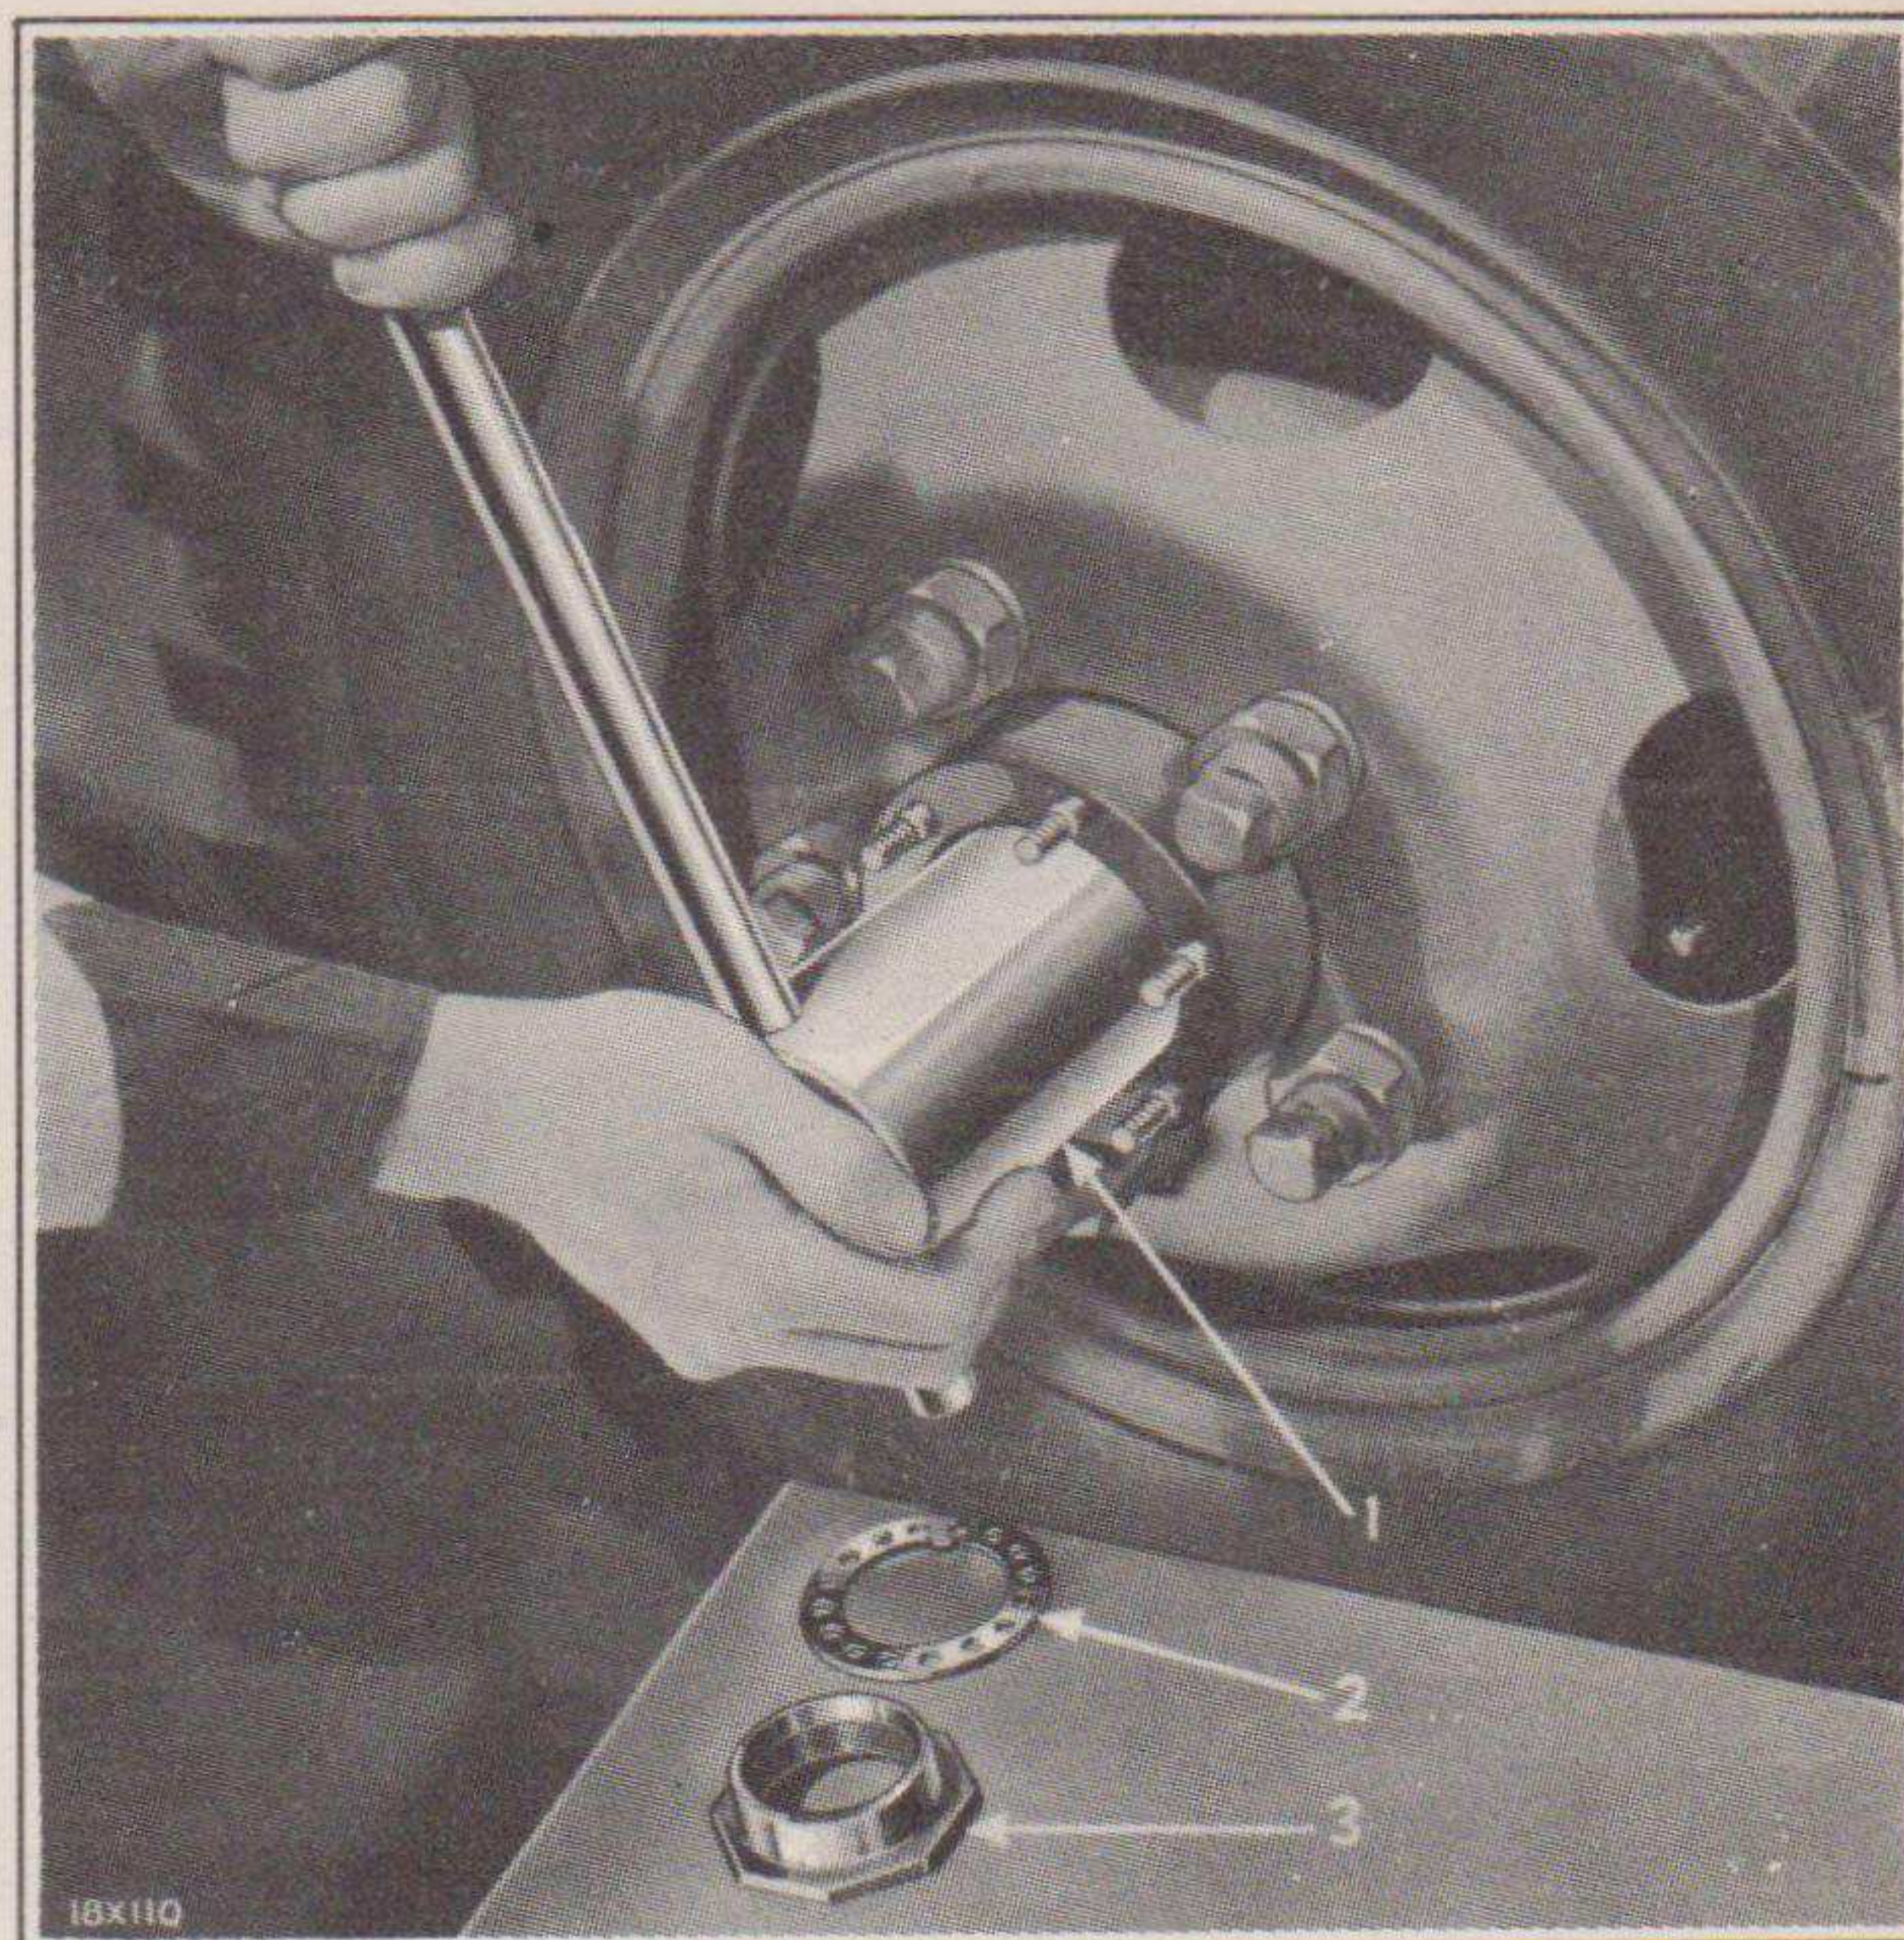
Removing Rear Wheel Bearing Adjusting Nuts or Adjusting Bearings
